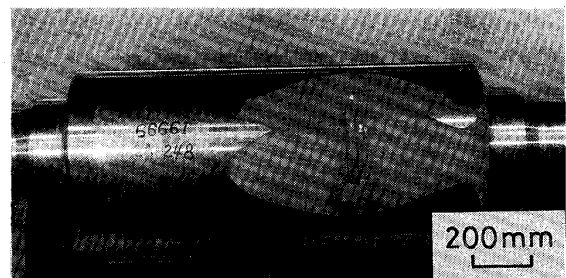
A typical spalling accident which occurred on a cold tandem mill work roll.
